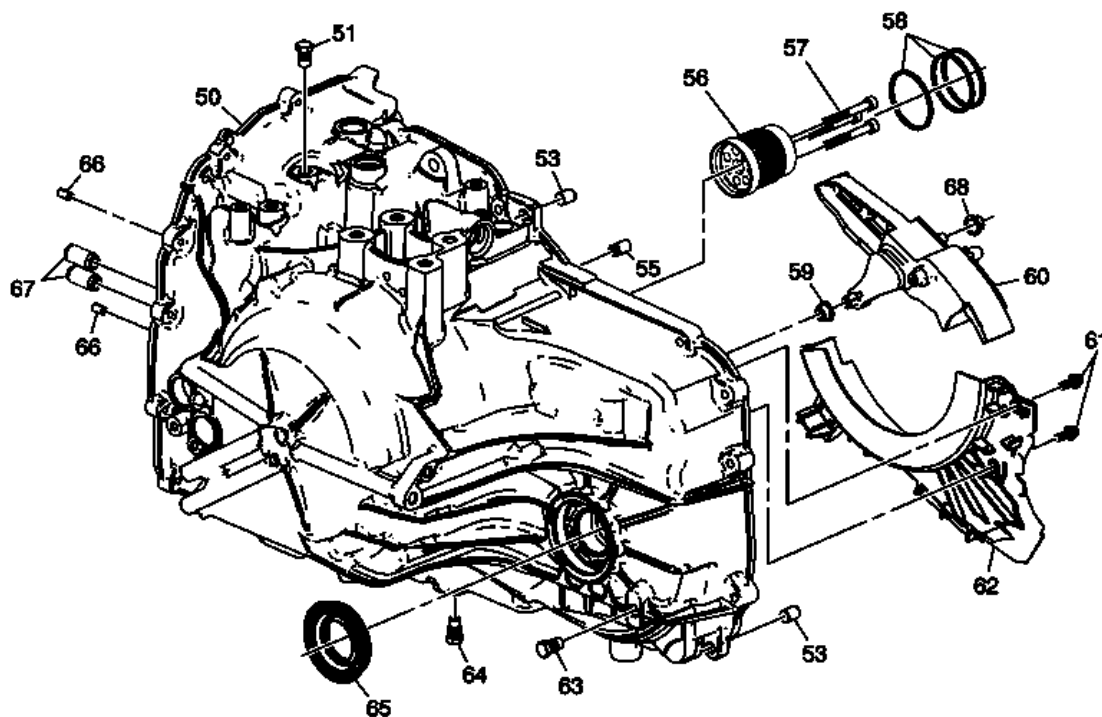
Transmission Case Assembly Components -- 6T40/6T45/6T50 -- Gen 2
